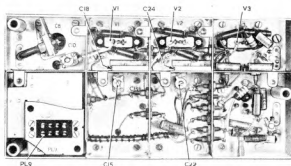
Amplifying unit (RF) Type 7111 underside view — cover removed
